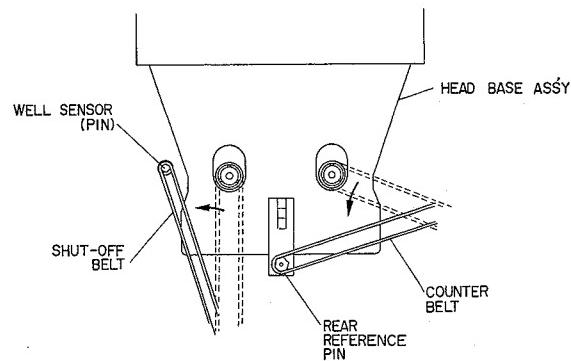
Ball Drive Mechanism Ass'y Replacement
